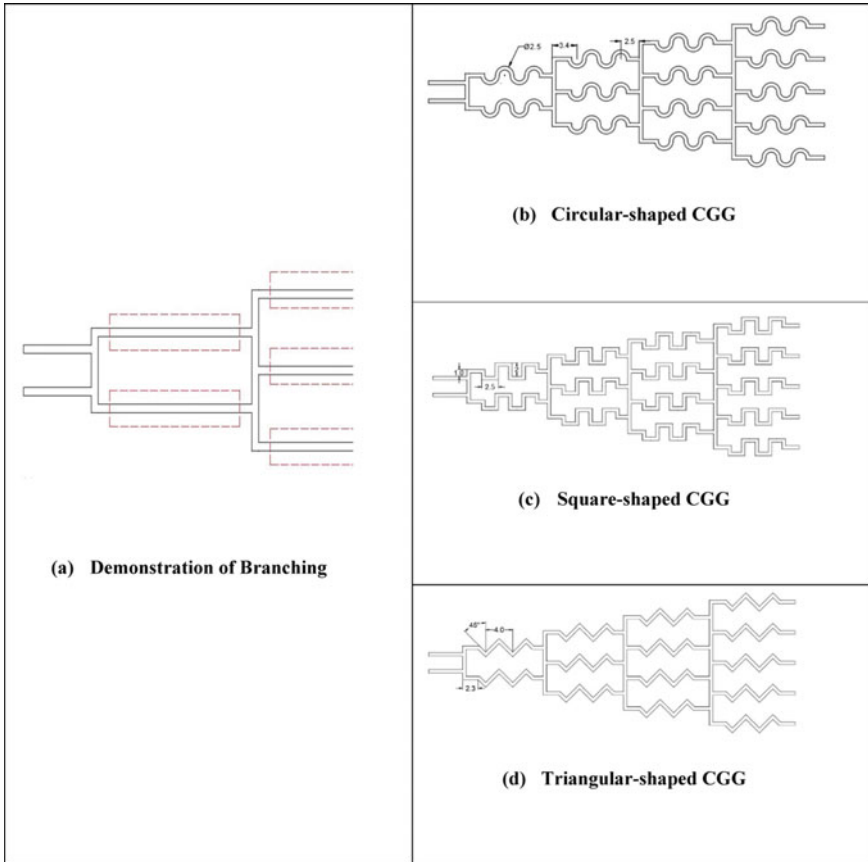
Technical drawings of designed circular, square and triangular CGGs produced in AutoCAD
